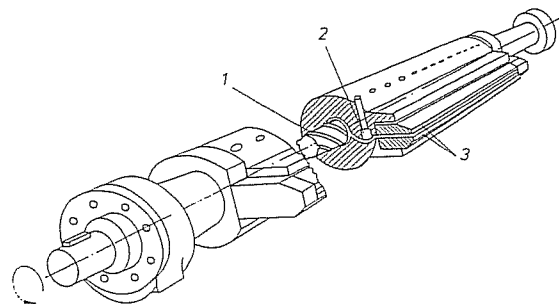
Screw die for sheet extrusion [171], 1 Screw, 2 Choker bar, 3 Adjustable lips
